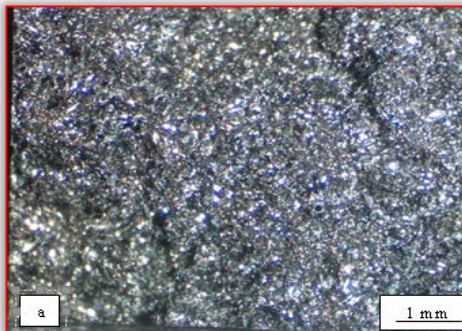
Fracture surface of cylinder head in the combustion chamber after tensile testing
